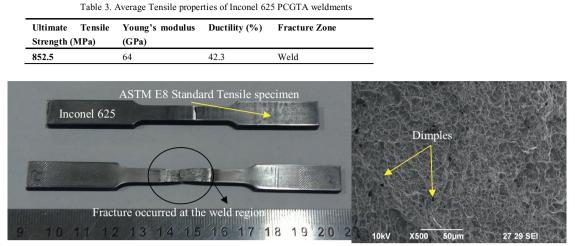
(a) Fractured Tensile Sample (b) SEM Fractograph of the fractured PCGTA Inconel 625 weld sample
